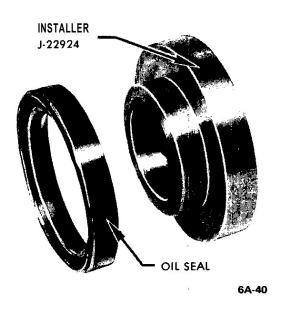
A-40 Installing Timing Cover Oil Seal on Protector
